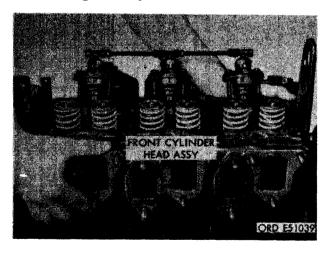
REMOVING OR INSTALLING FRONT CYLINDER HEAD ASSEMBLY.
